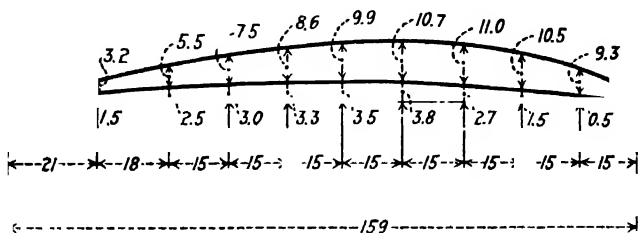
Aerofoil Section of Modern Airplane Suitable for Heavy Loading.
